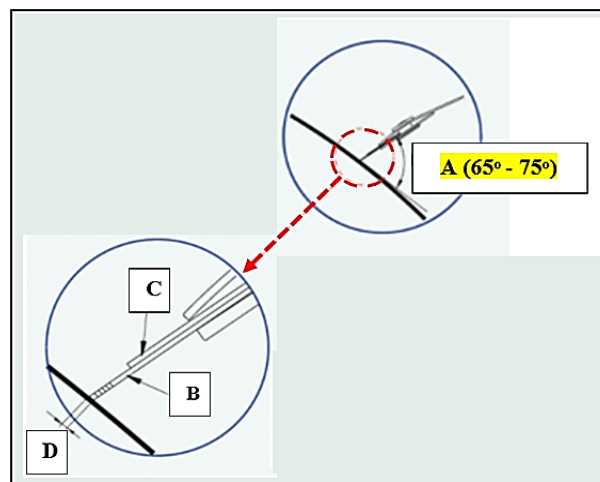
Blade holder configuration at the rotogravure cylinder [11]
